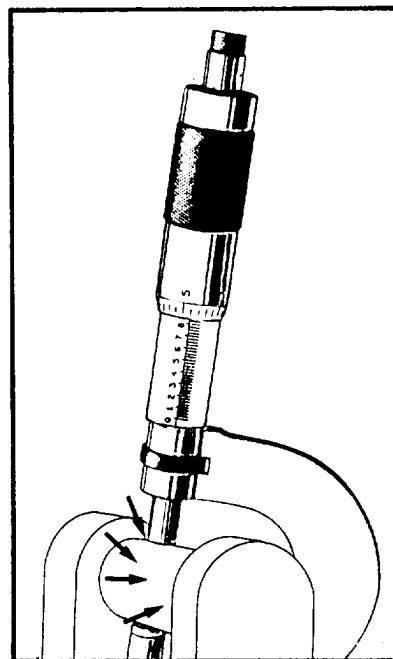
Measuring the journals at different points around the diameter and along the length of the bearing surface.
